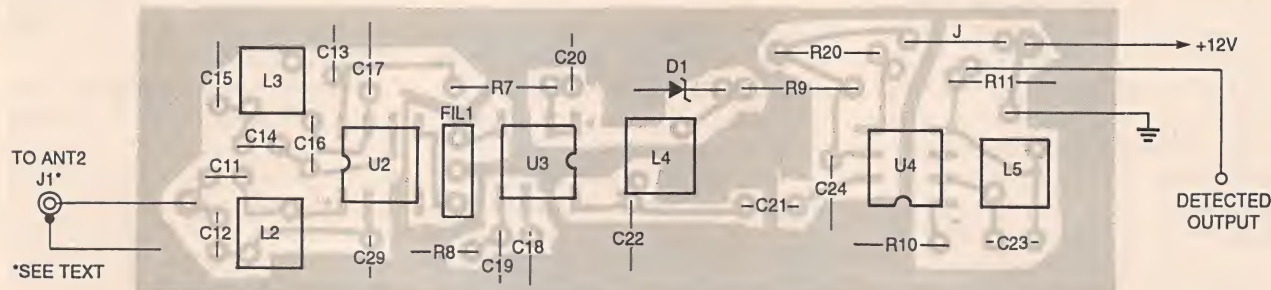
Here is the parts-placement diagram for the receiver's RF board. Note that the RF board has one jumper wire, and that FIL1 is a 3-terminal bilateral device that can be placed into the circuit board in any direction.
